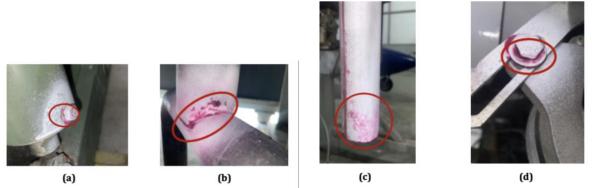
(a) Coated Bolt and Nut; (b) Towing Bar; (c) Modified Exhaust Engine; (d) Uncoated Bolt and Nut
